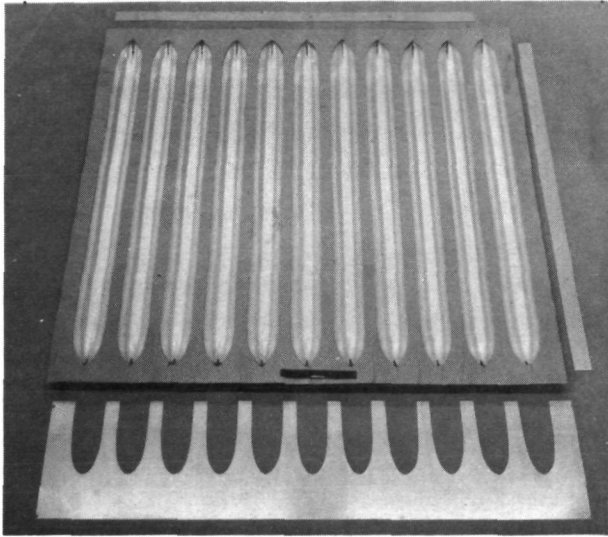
CIRCULAR TUBE ASSEMBLY BONDING LAY-UP
